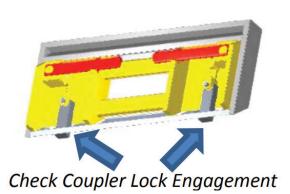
B QUICK ATTACH COUPLER LOCKED TO ATTACHMENT BRACKET
